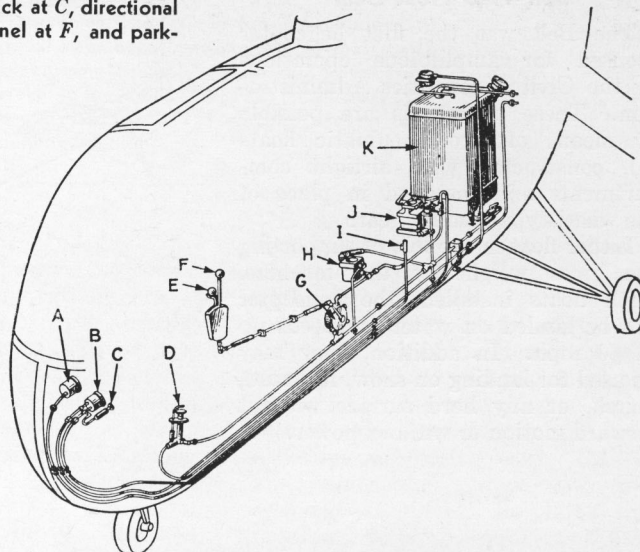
Phantom view of the XR-9B fuel system (A) engine gauge; (B) fuel-quantity gauge; (C) fuel gauge pump; (D) primer pump; (E) mixture lever; (F) lever to actuate wobble pump; (G), (H) fuel pump; (I) primer to cylinders; (J) carburetor; (K) fuel tank.
